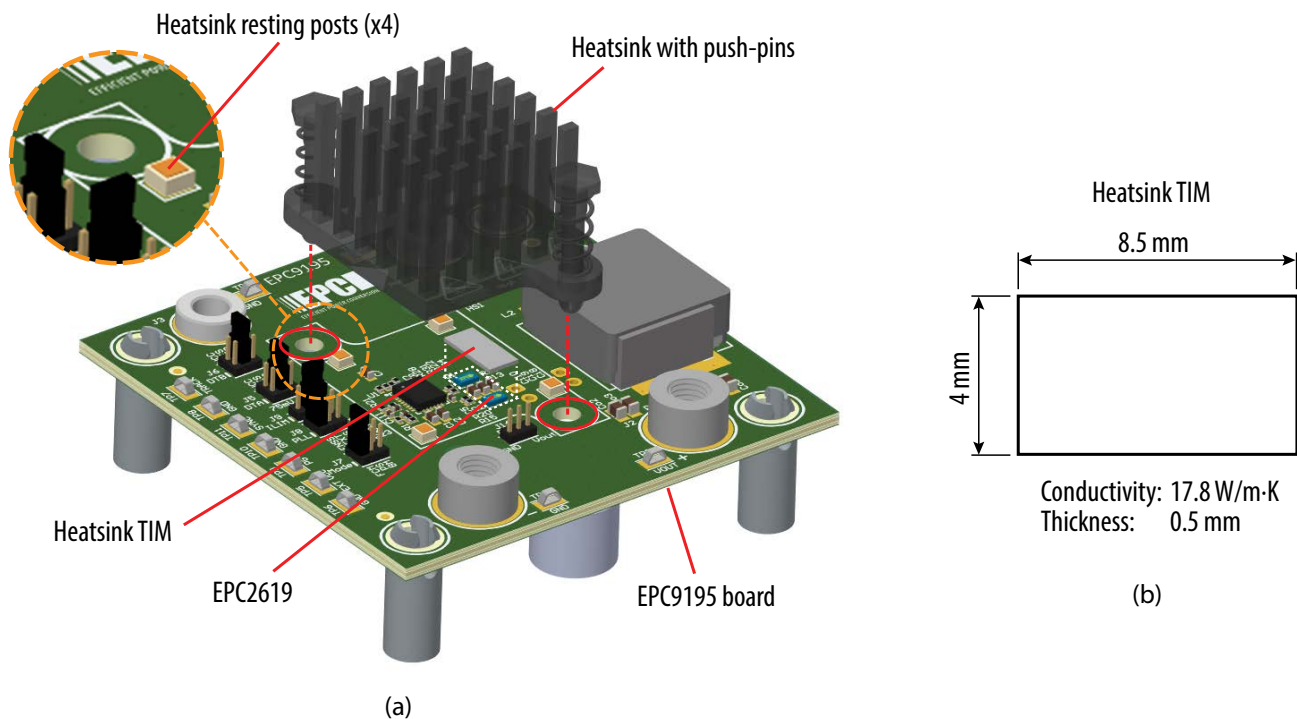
(a) Exploded view of the EPC9195 heatsink assembly, (b) Details of the recommended TIM's used on the EPC9195 Evaluation Board.
